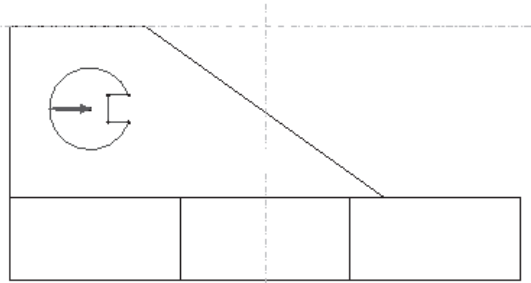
Sketch for the extrude cut and arrow showing the direction of material removal
